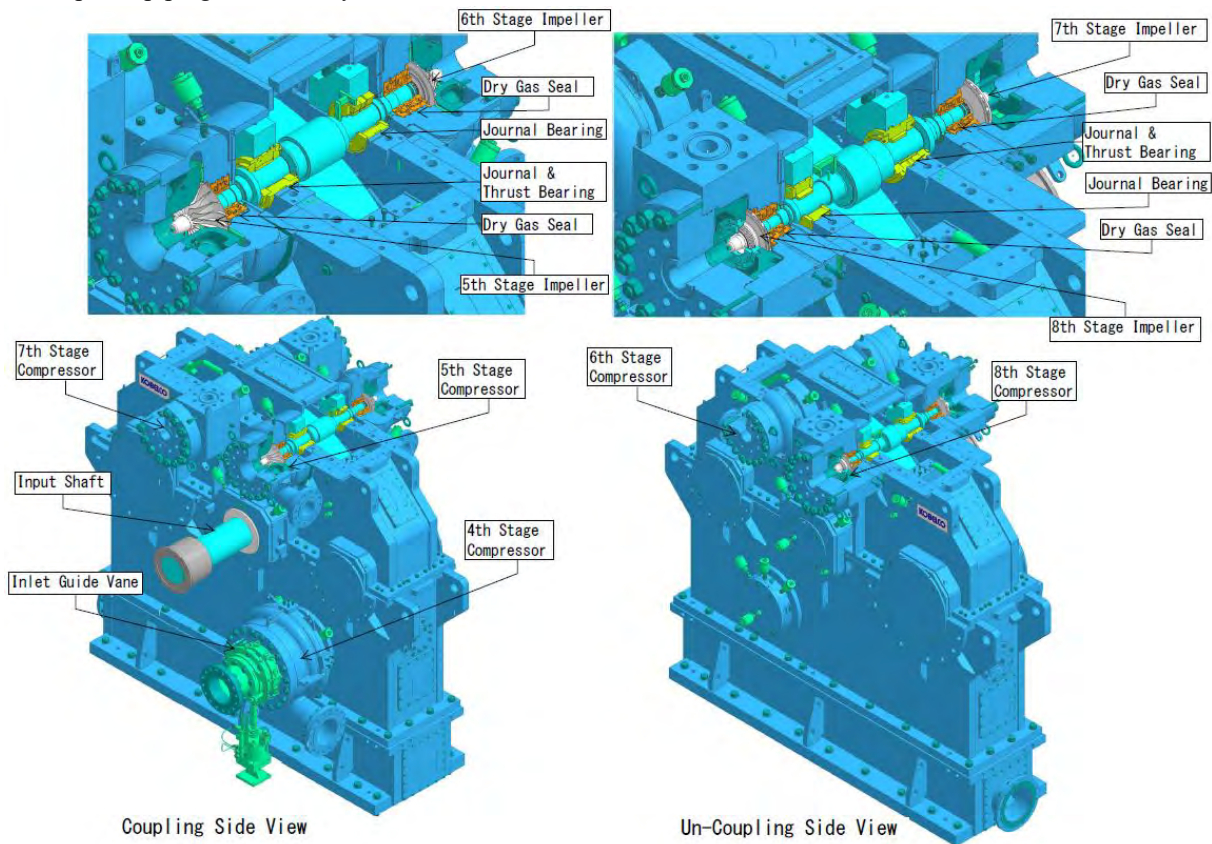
External Look of Integrally Geared Centrifugal Compressor (Prototype Machine)
